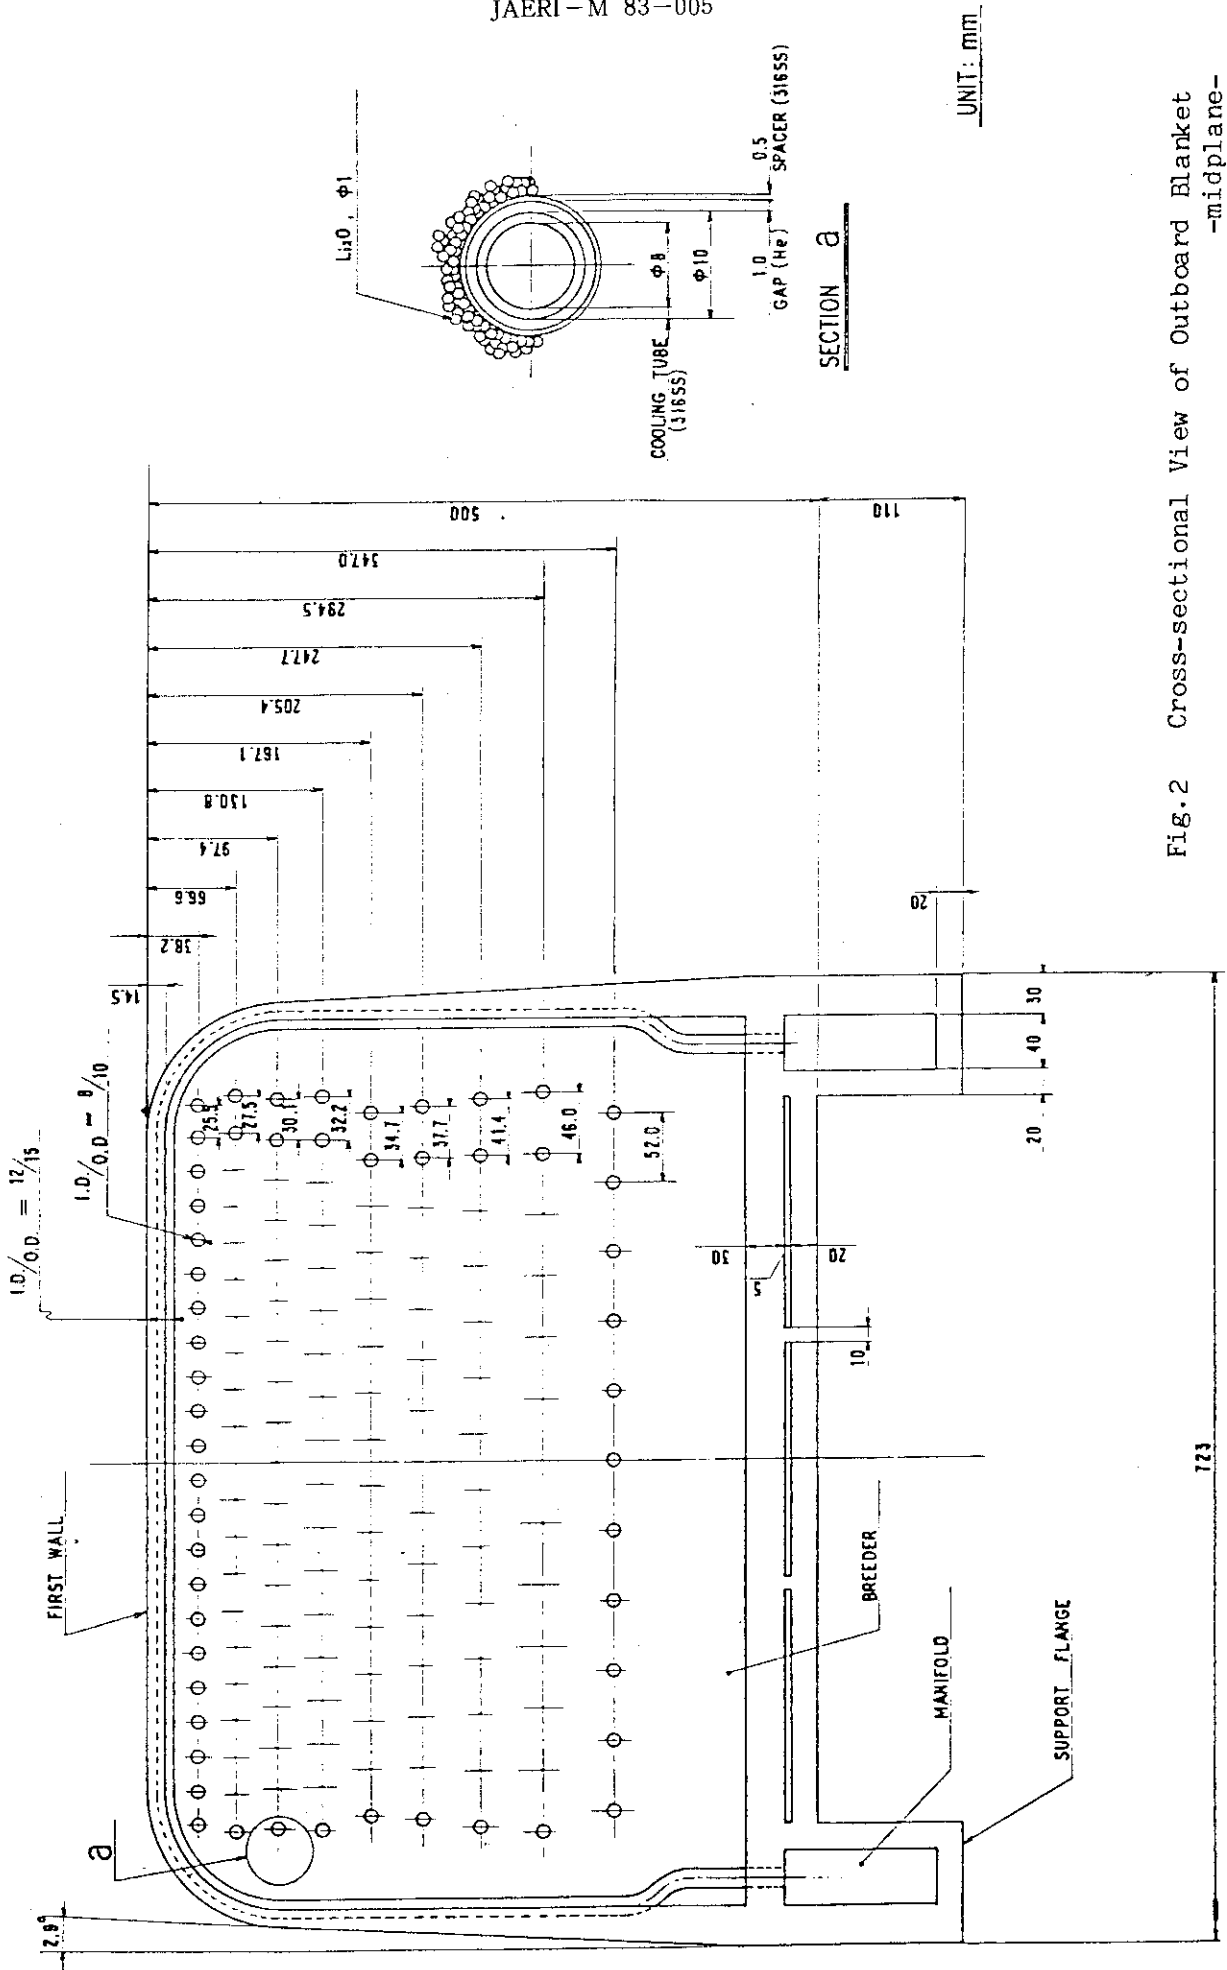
Cross-sectional View of Outboard Blanket -midplane-
